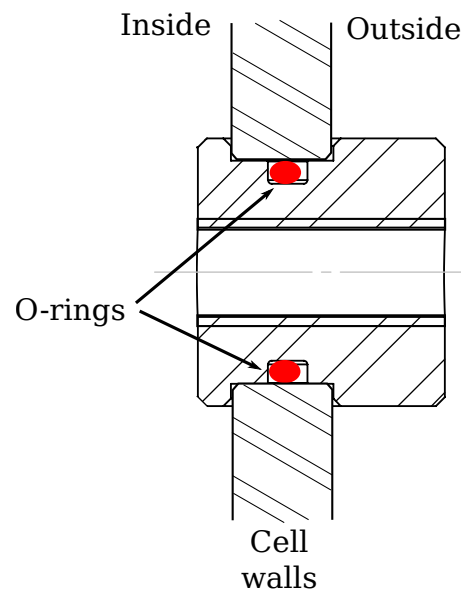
Detail of the intermediate ring used in the prototype 2. The fibre-optic wires are extracted through the threaded passages. Tolerances for the O-ring groove were not precise enough and caused the extrusion of the joint.
